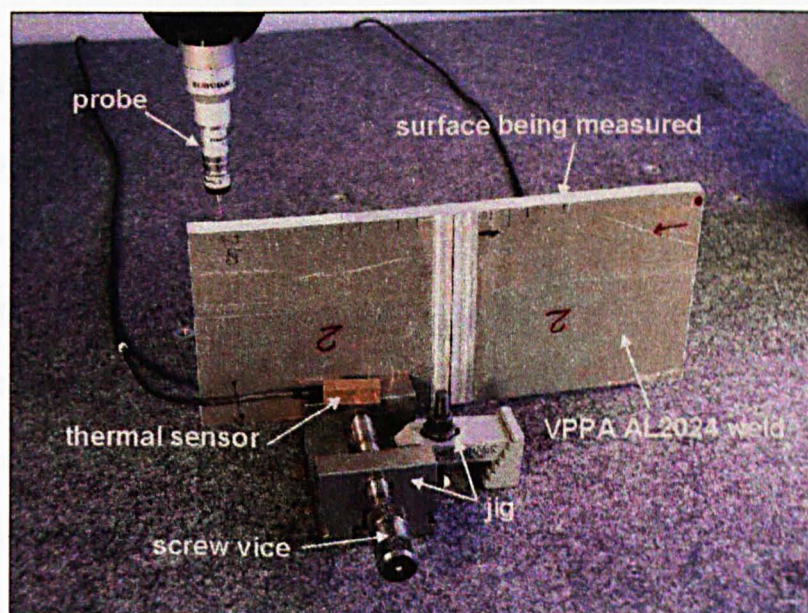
Set-up for CMM contour measurement (VPPA 2024-T351 weld)
